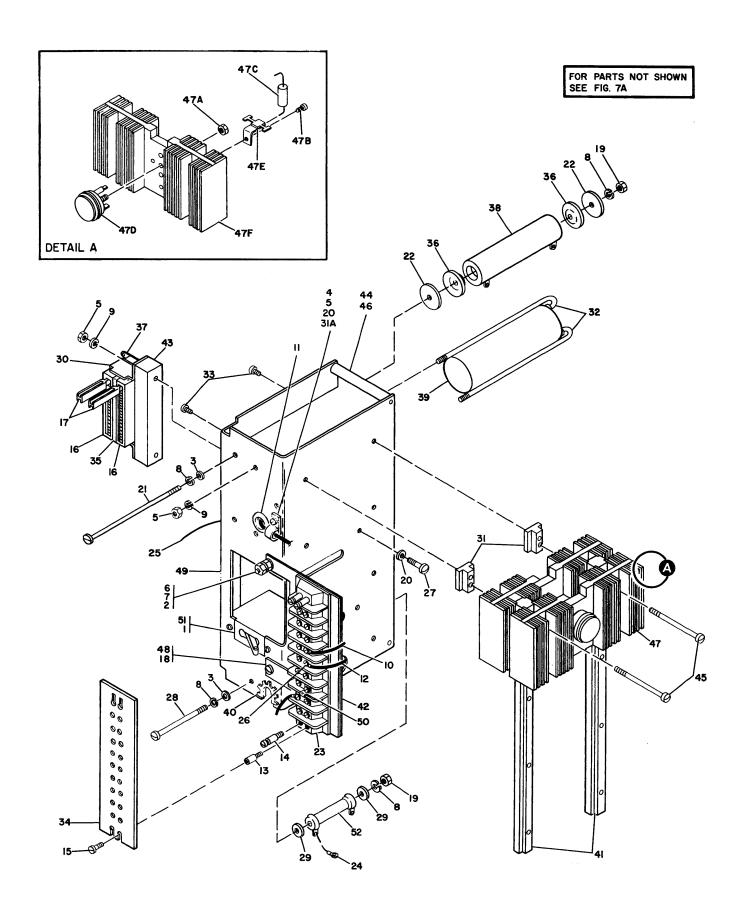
G. MID PAC POWER SUPPLY ASSEMBLY. SEE LIST 7G.
